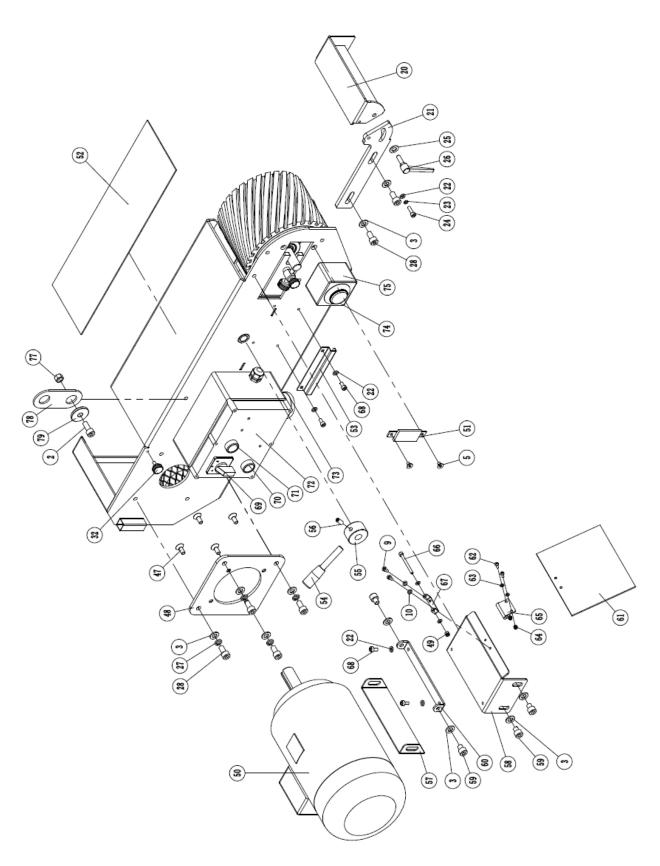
Spare parts drawing 3 MBSM 75-240-1 230 V /400 V, MBSM 75-240-2 400V and MBSM 150-240-2 400V
